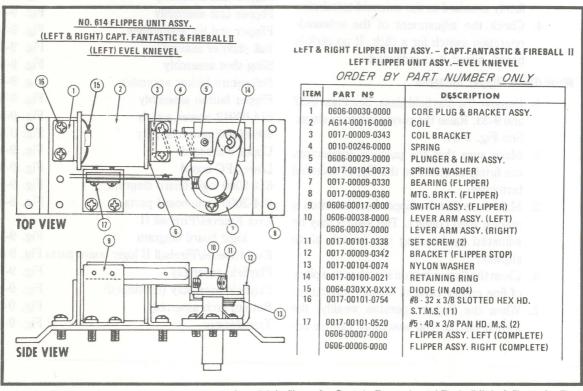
Flipper unit assembly and parts list. Left and right flipper for Captain Fantastic and Fireball II. Left flipper for Evel Knievel.
